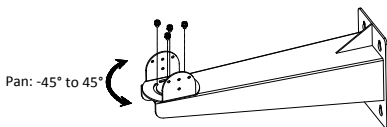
Screw the PT Joint to Wall Mounting Bracket
